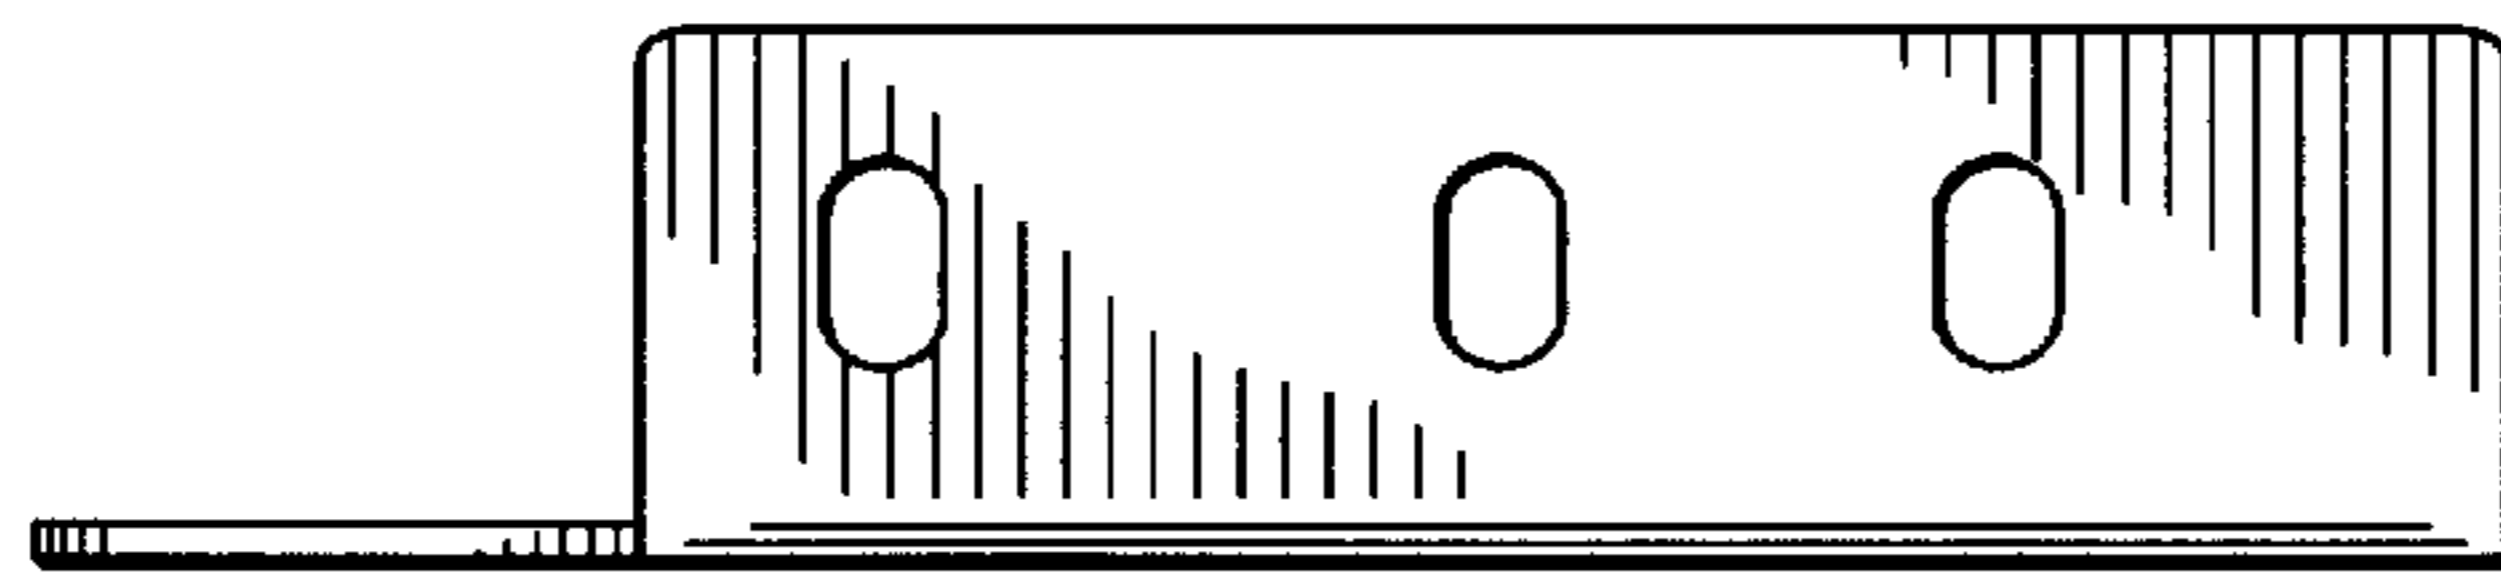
is a perspective view of an end bearing plate of my new design;
